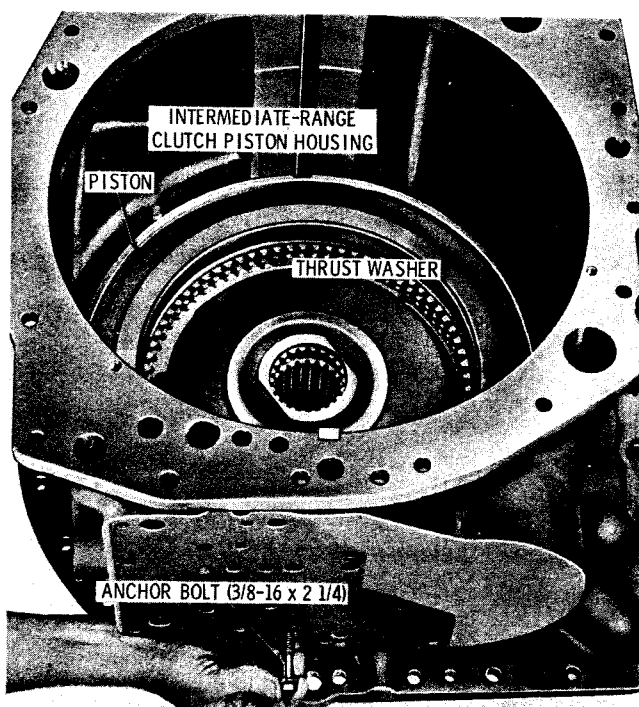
Installing intermediate-range clutch piston housing anchor bolt
